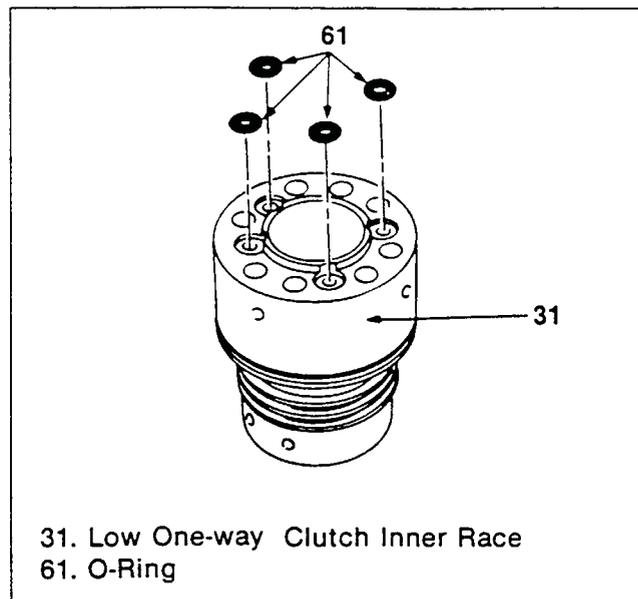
Low One-way Clutch Inner Race O-ring Removal
